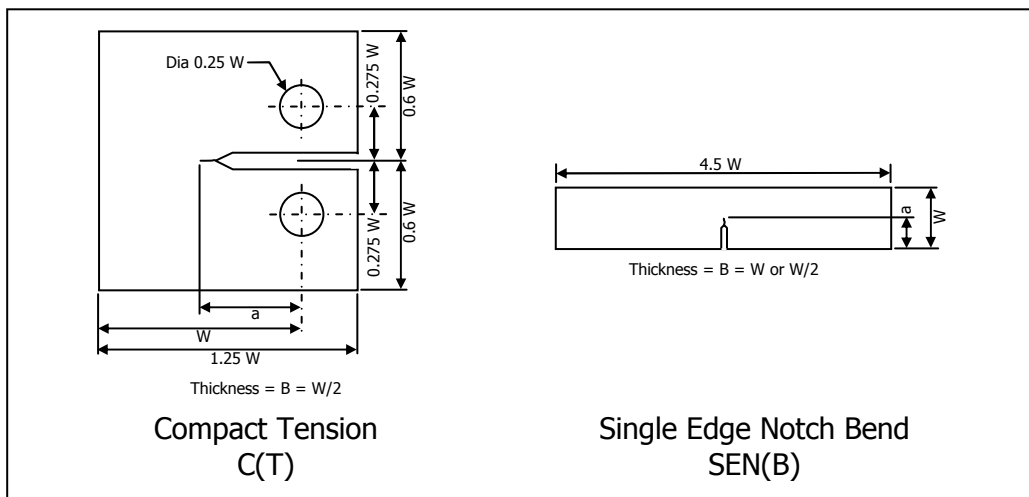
Fracture Toughness Specimen Geometries<sup>[31]</sup>
